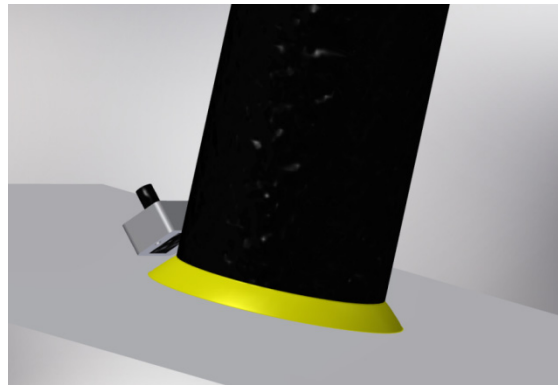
Probe model on pipe in sheet fillet weld
